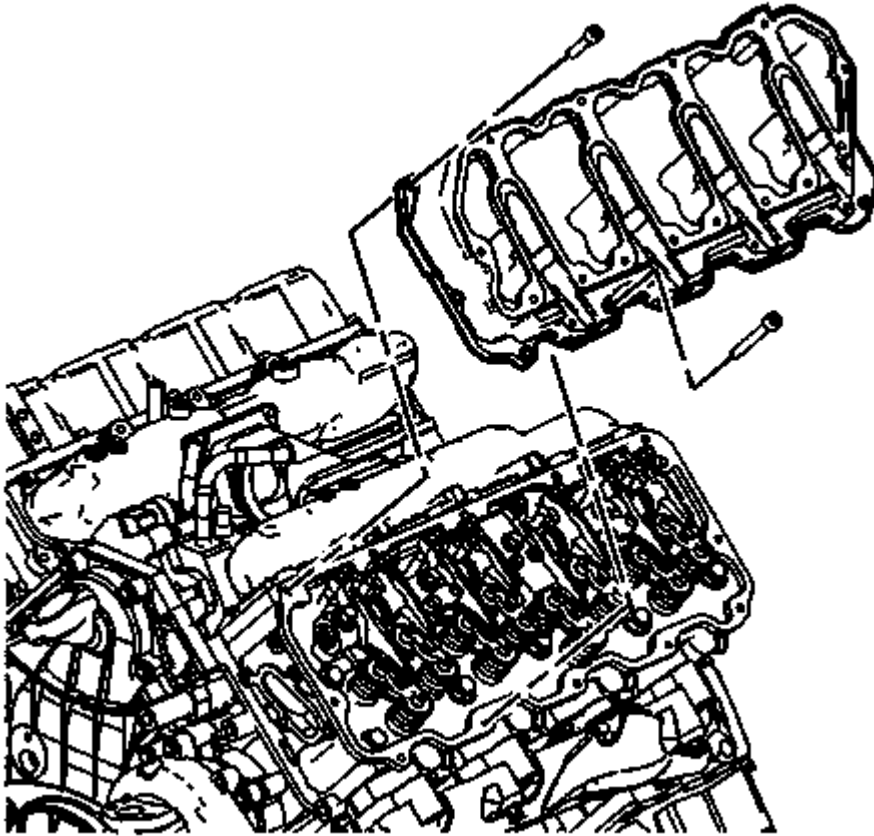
View Of Lower Valve Rocker Arm Cover (Left)
